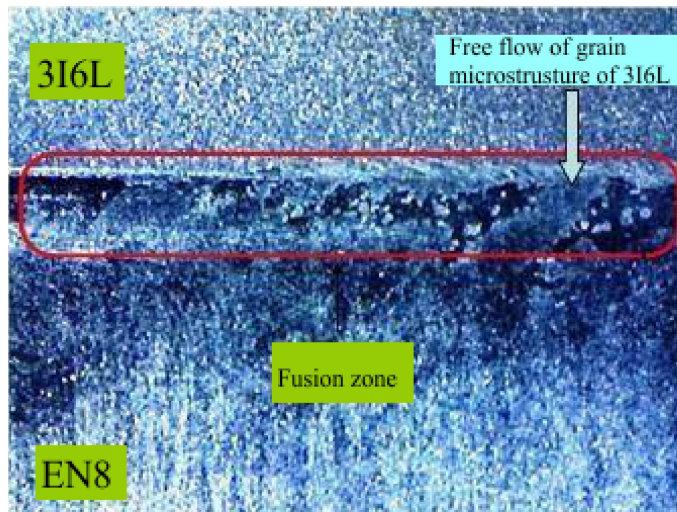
Macrostructure of the weld joint (for sample 9).
